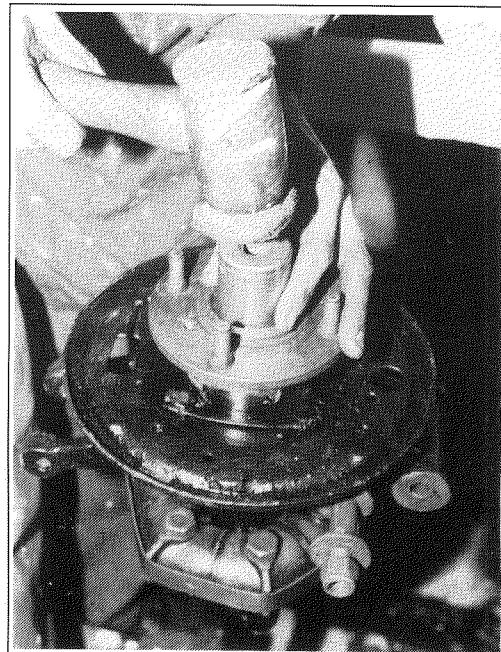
A little gentle persuasion will probably be required to push the outer hub on far enough to start the securing nut, easily achieved with a large socket and hammer.
